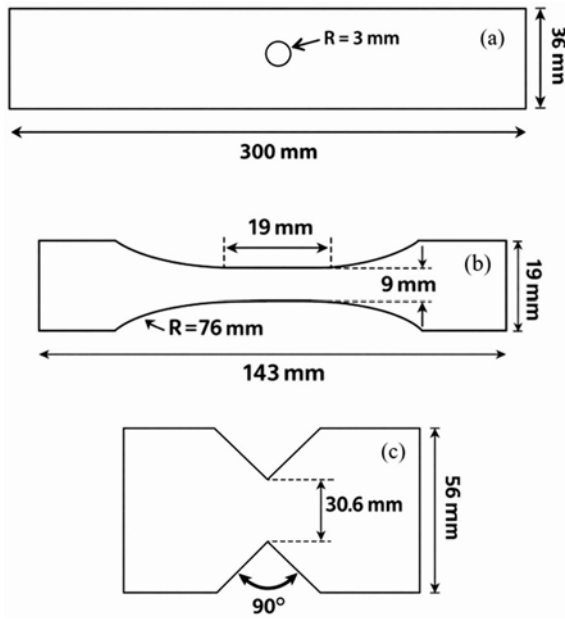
Dimensions of the specimens: (a) OHS, (b) TS, and (c) SS [33–35].
